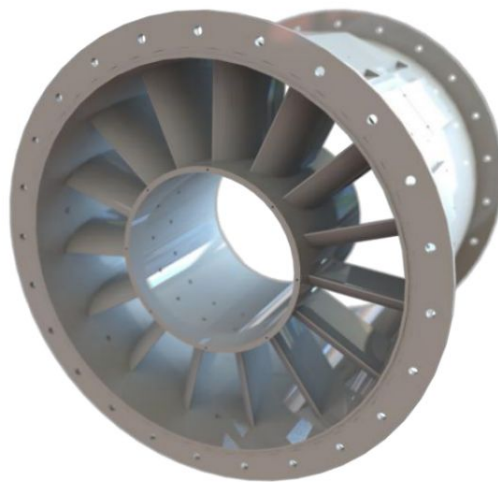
The TurboLab stator in full assembly with 15 blades and mounting holes.
